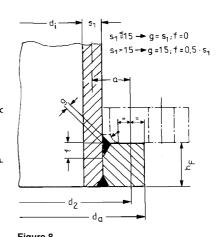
Welded-on flange (gasket not shown on drawing).
